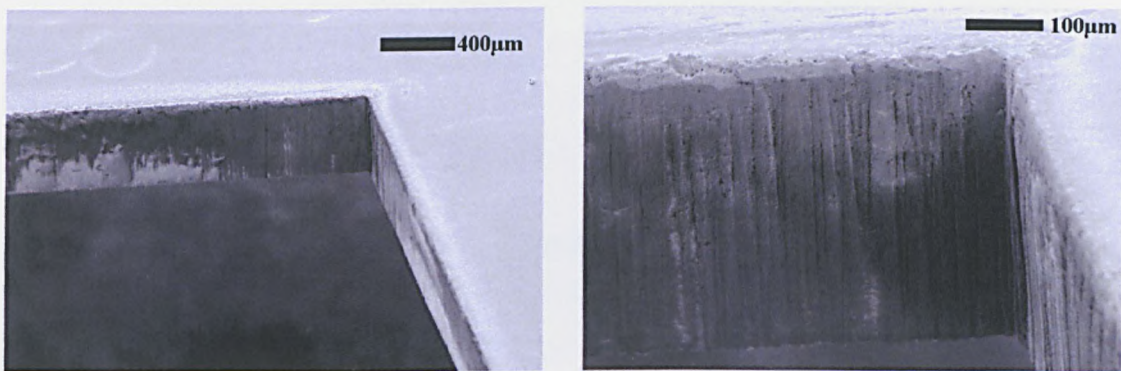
Cutting of silicon using gas tube assist with Ar.
